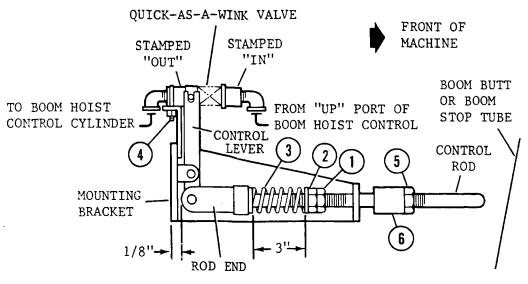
AUTO BOOM STOP ASSEMBLY
